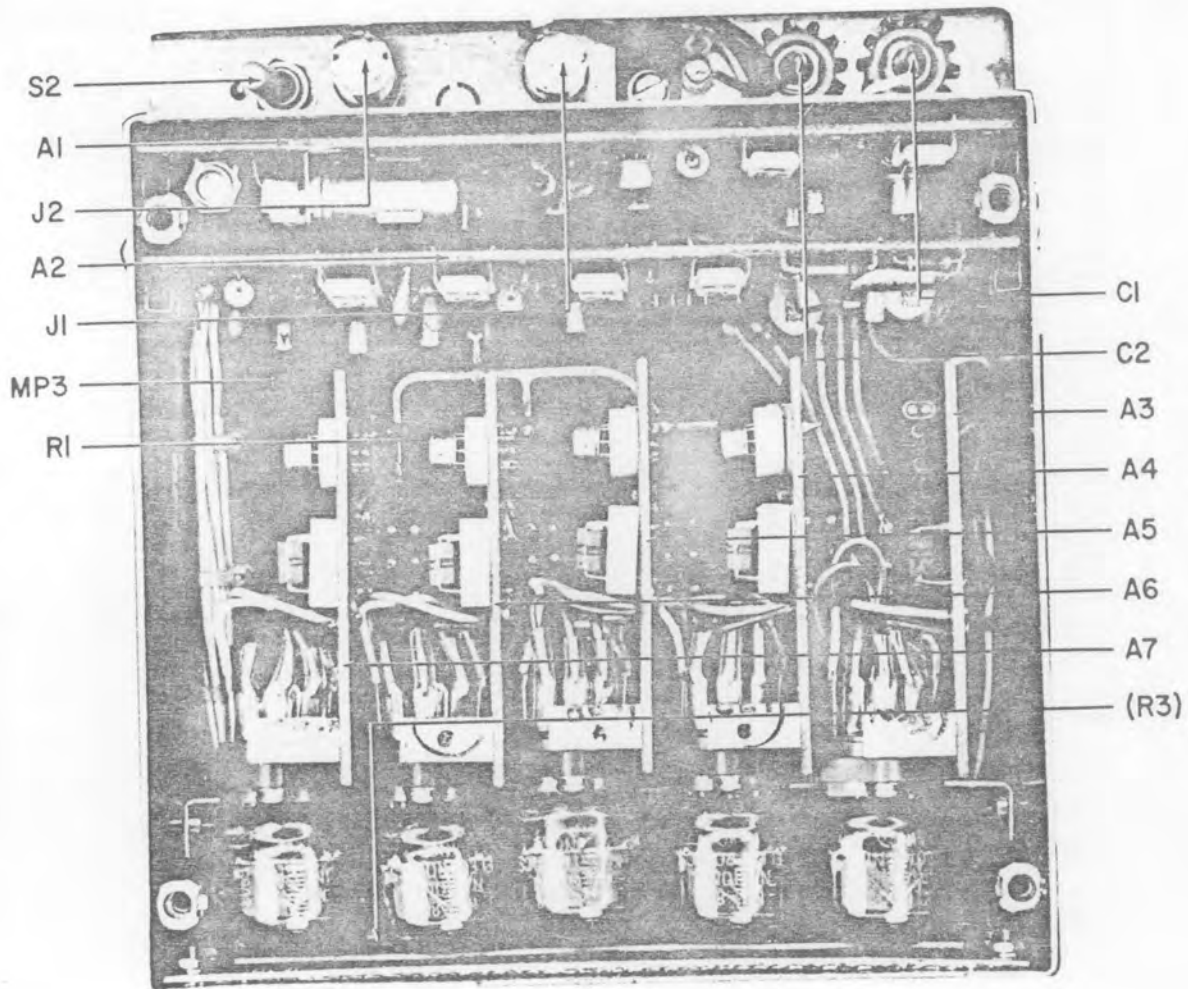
Type 79386 Counter Assembly (A8), Component Locations
